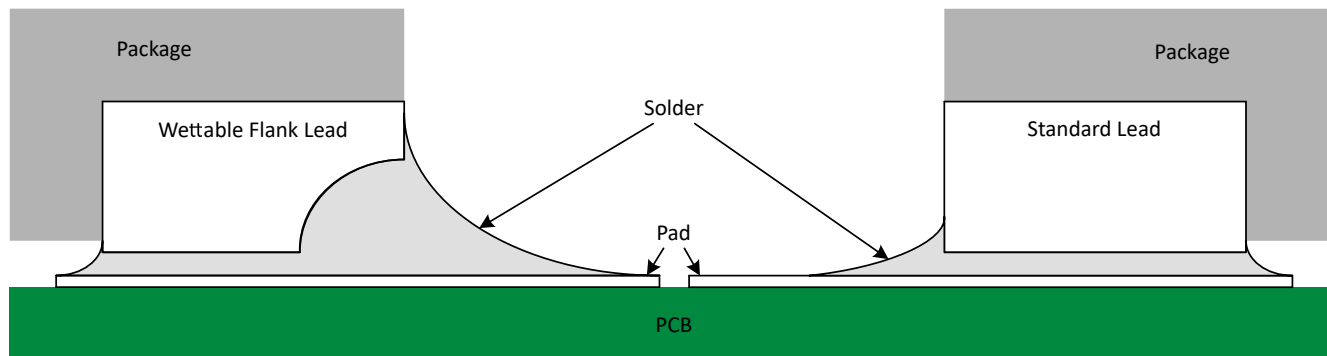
Simplified Cutaway View of Wettable-Flank QFN Package and Standard QFN Package After Soldering
